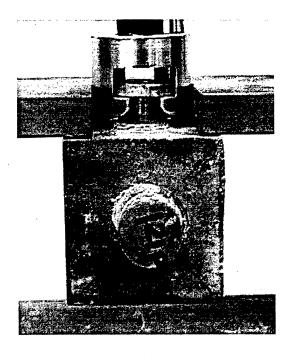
Special Fixture for Pull-Off Test with Instron Testing Machine
